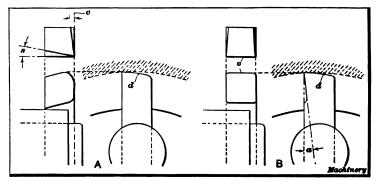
Boring Tools for Roughing and Finishing Cuts
